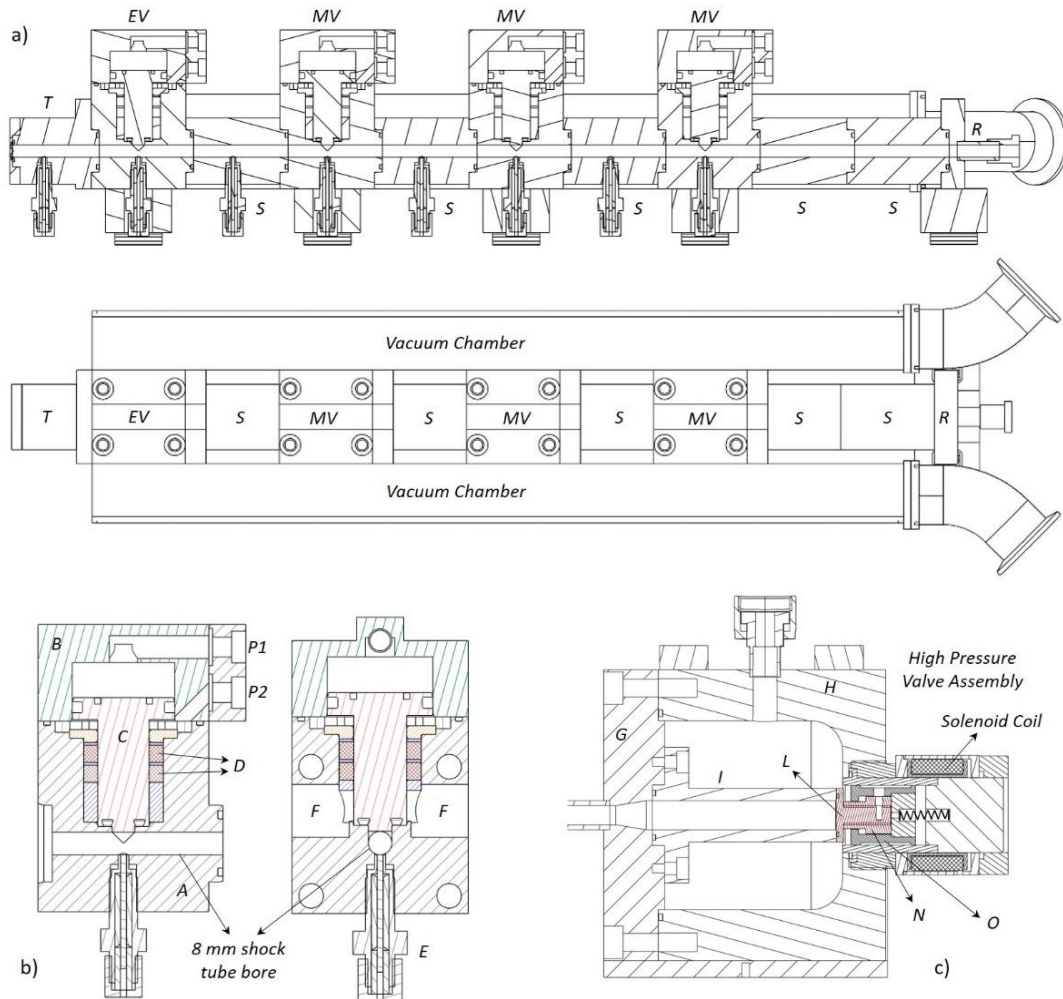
a) Cross-sectional view and top view of the driven section of the ICARE-HRRST. EV: end valve; MV: middle valves; T: end section; S: spacers; R: connection element. b) Cross-sectional views of the pneumatic valves EV and MV and FV which are identical in design. Compressed air is connected to ports P1 and P2. A: valve main body; B: valve cap; C: piston; D: lip seals; P1: valve closing port; P2: valve opening port; F: exhaust ports for evacuating HRRST driven section; E: pressure sensor holder. c) Cross-sectional view of the driver section showing the high-pressure chamber and solenoid actuated valve. G: flange with convergent section; H: main chamber body; I: leading part of the driven section; L: poppet; N: outer body; O: armature body. Parts L, N and O form the armature.
